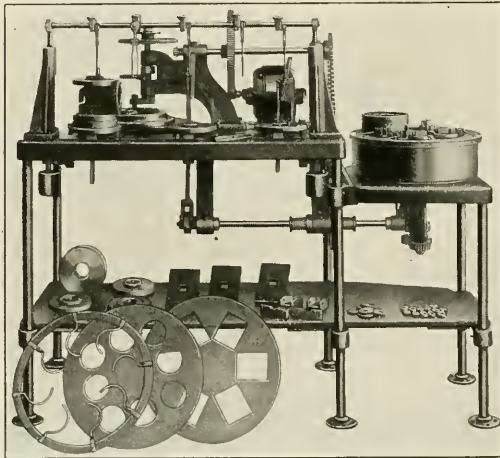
General View of Semi-Automatic Valve Finishing Machine
